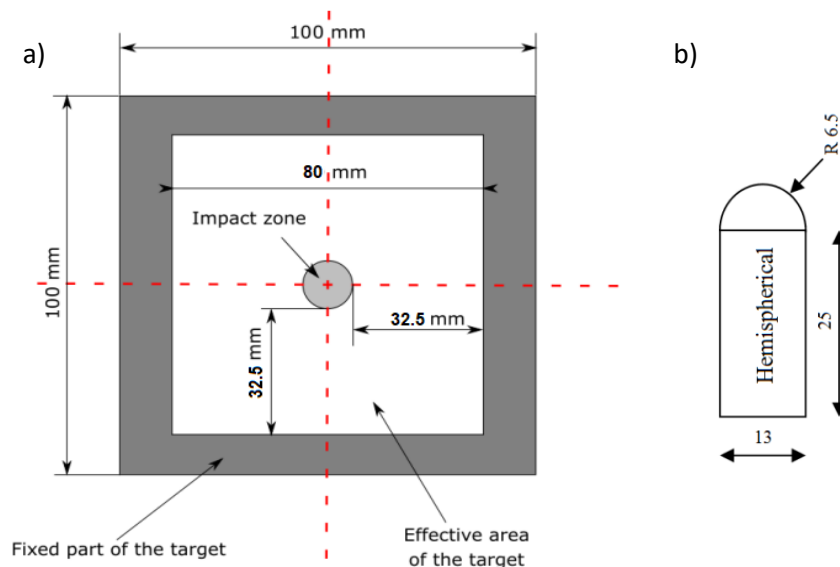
(a) Dimensions of the specimen, and (b) projectile.
